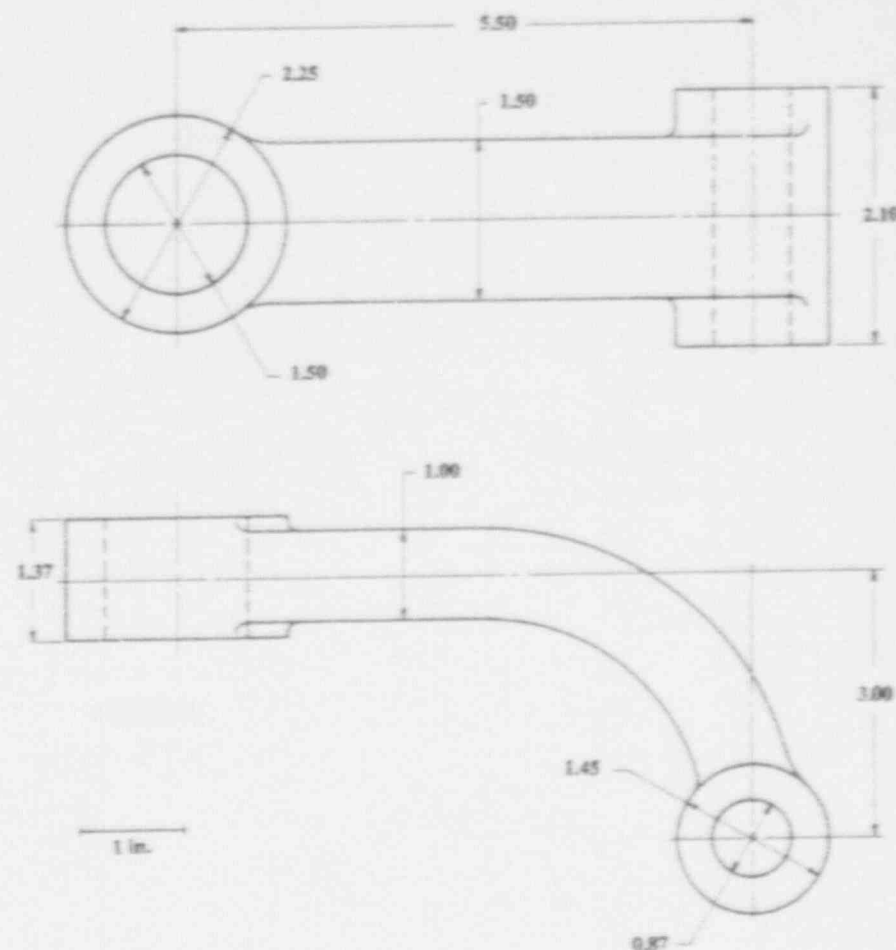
SAMPLE NO. 242, 8-INCH CHECK VALVE. Dimensions in inches. Diagram is schematic.
